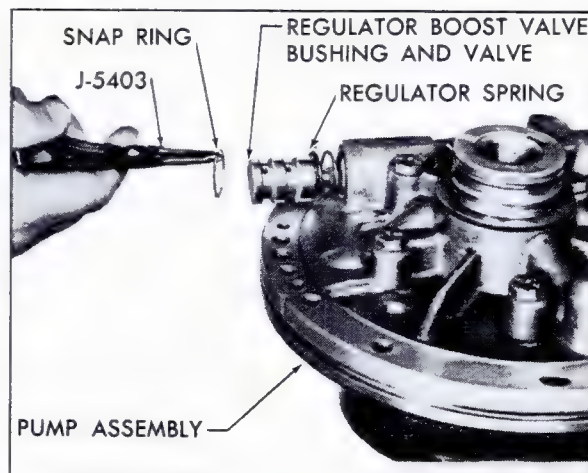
Removing Pressure Regulator Valve Snap Ring
